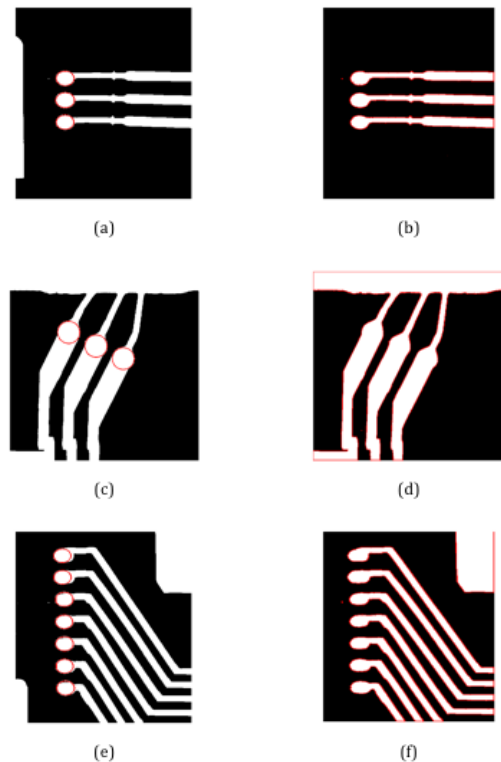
Images (a), (c) and (e) shows the soldering joints identification, where (b), (d) and (f) shows the detection of pins along with the soldering joints
